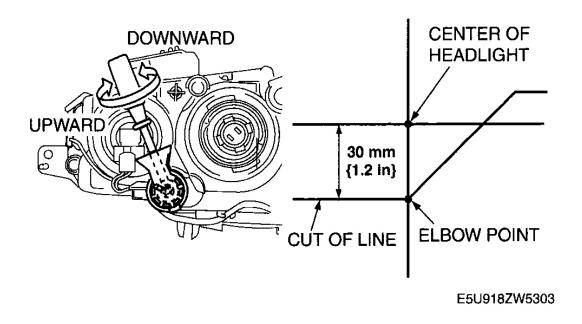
Identifying Aiming Adjustment Screw Courtesy of MAZDA MOTORS CORP.
